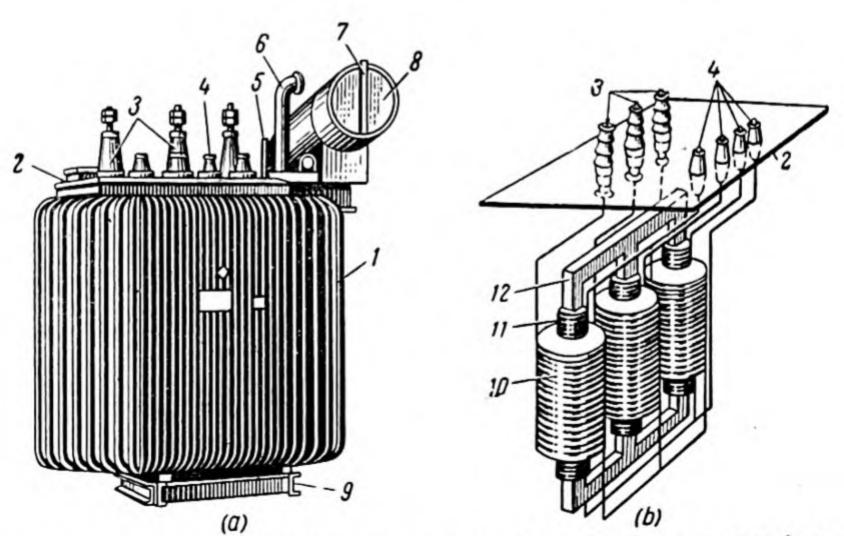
Natural air-cooled, oil-immersed, three-phase power transformer: a—external view, b—core and windings assembly removed from transformer.
